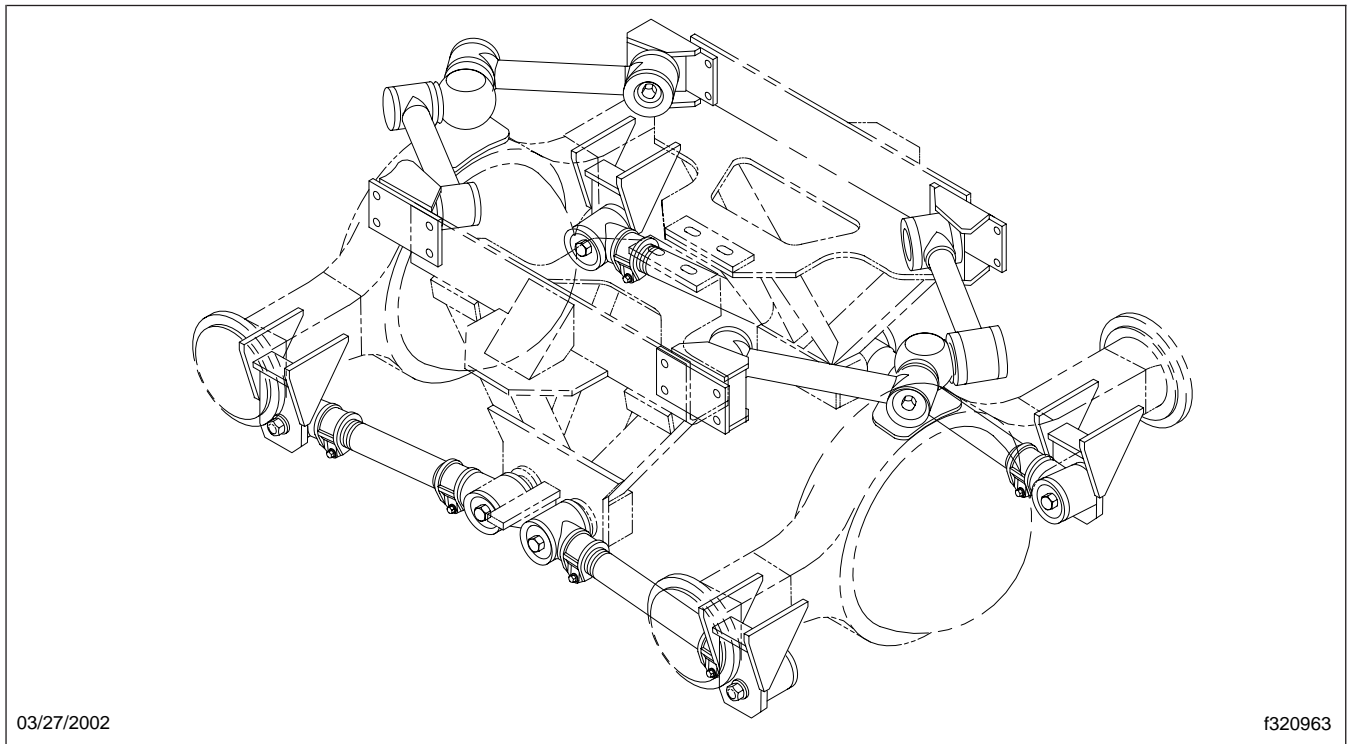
, Torque Rod Arrangement, 40,000-Pound Capacity Suspension
